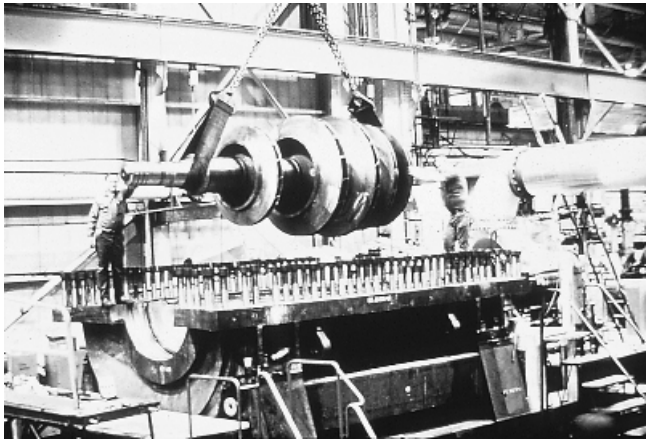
Compressor rotor installed in a horizontally split centrifugal compressor. (*Dresser-Rand Company, Olean, N.Y.*)
